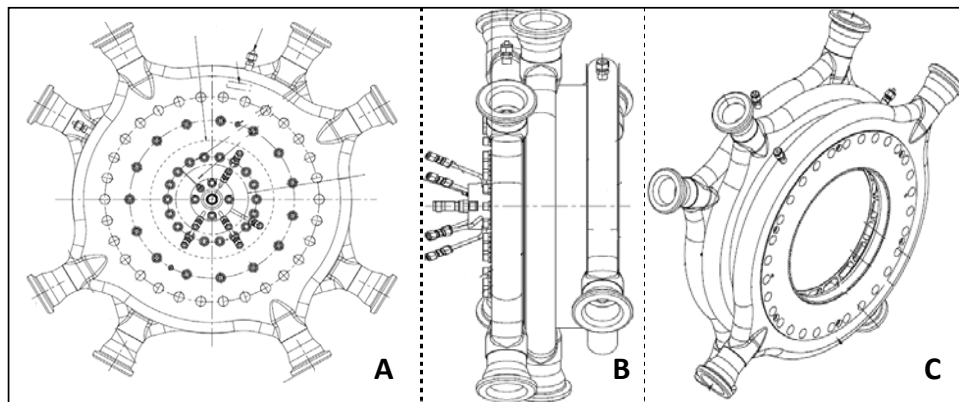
Syngas Main Injector Assembly: A) Front View; B) Side View; C) Rear View
